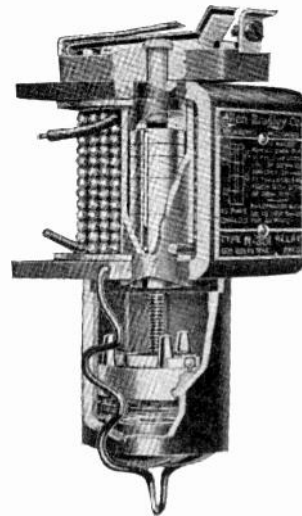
Sectional view of a magnetic overload-relay and dash pot. When the core is lifted the rod above it forces open the spring contacts which break the circuit to the holding magnet. (Courtesy Allen Bradley Co.)
